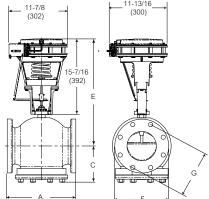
MK-6911 with Flanged 2-Way Globe Valves ^a
